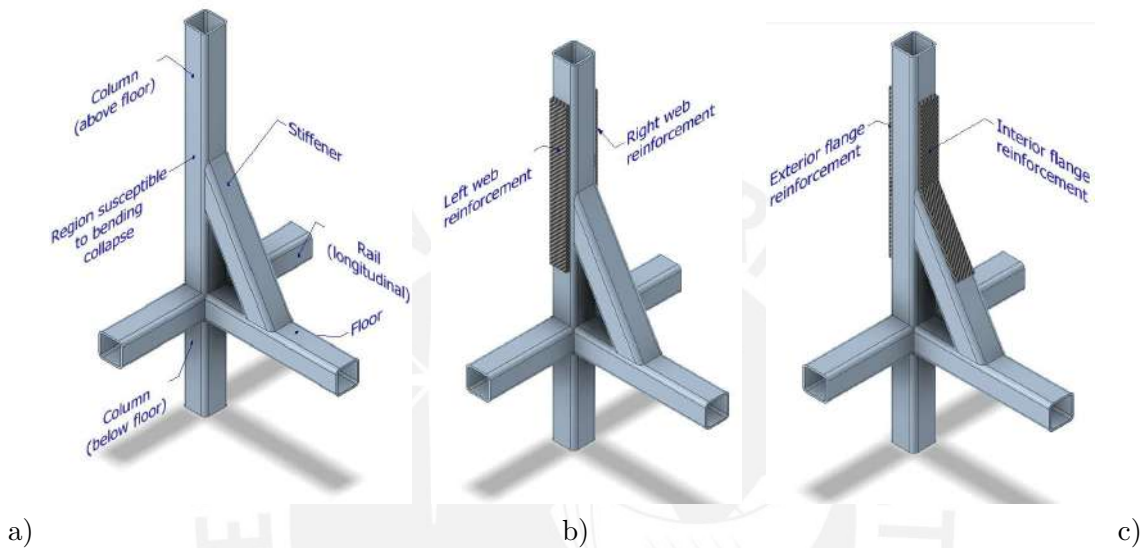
Example of implementation of the proposed reinforcements on a floor-column joint of a bus. a) Original structure, b) Webs reinforced (LR reinforcement, c) Flanges reinforced (UD reinforcement). This assembly can be replicated in several lightweight structures.
